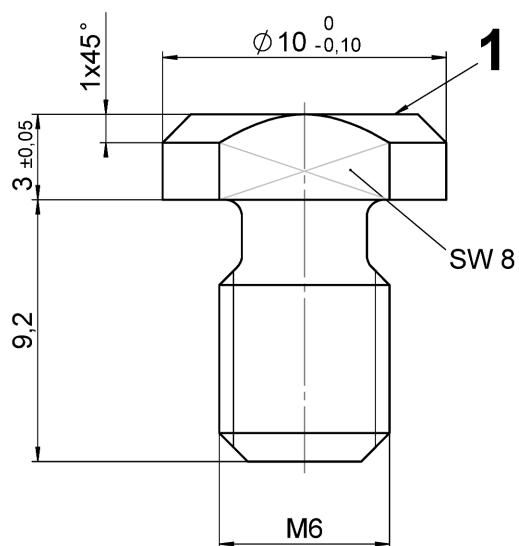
P-176.F16 (1 = contact surface hardened and polished)
